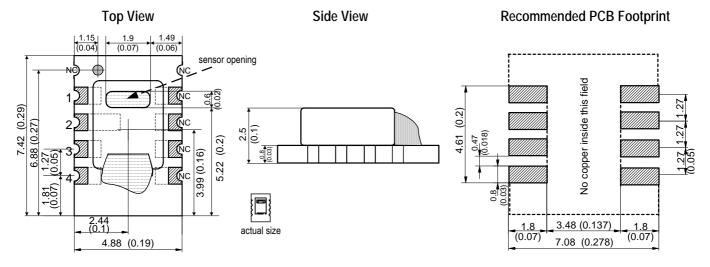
SHT1x drawing and footprint dimensions in mm (inch)
